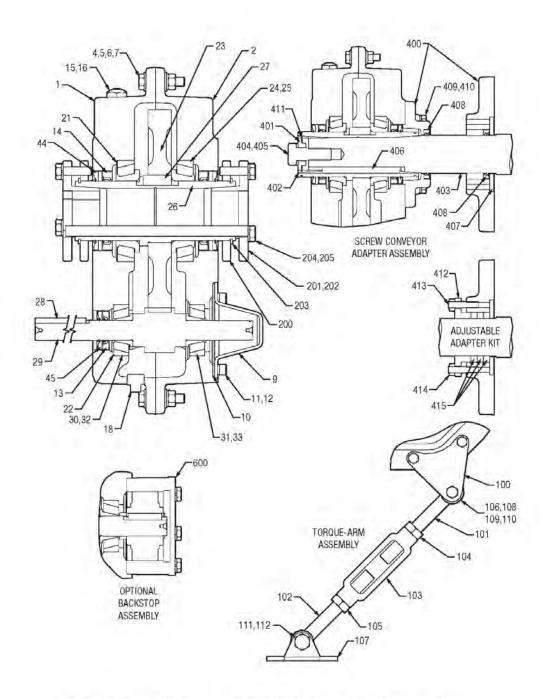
Parts for TA0107L thru TA7315H Taper Bushed Single Reduction Reducers
